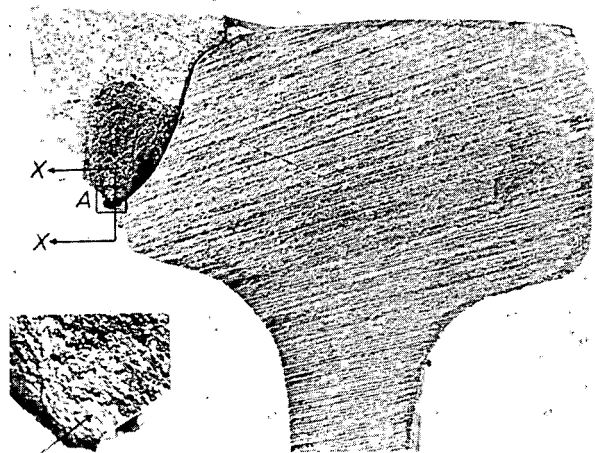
CLOSE-UP OF FLANGE CRACK
